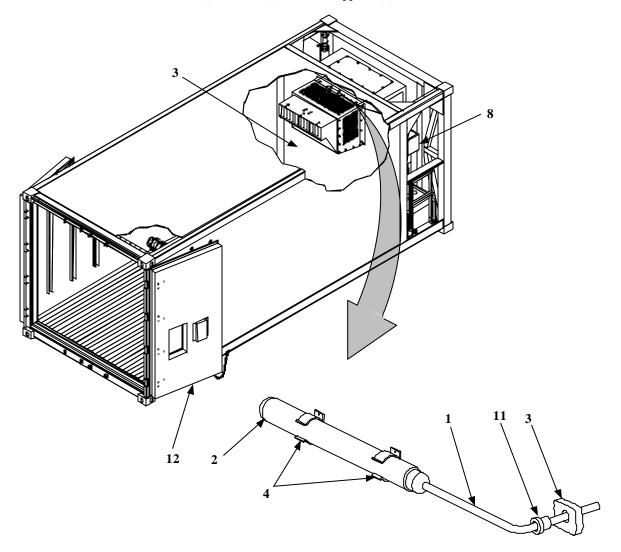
Recording Thermometer Element, Removal (Sheet 2 of 2)
